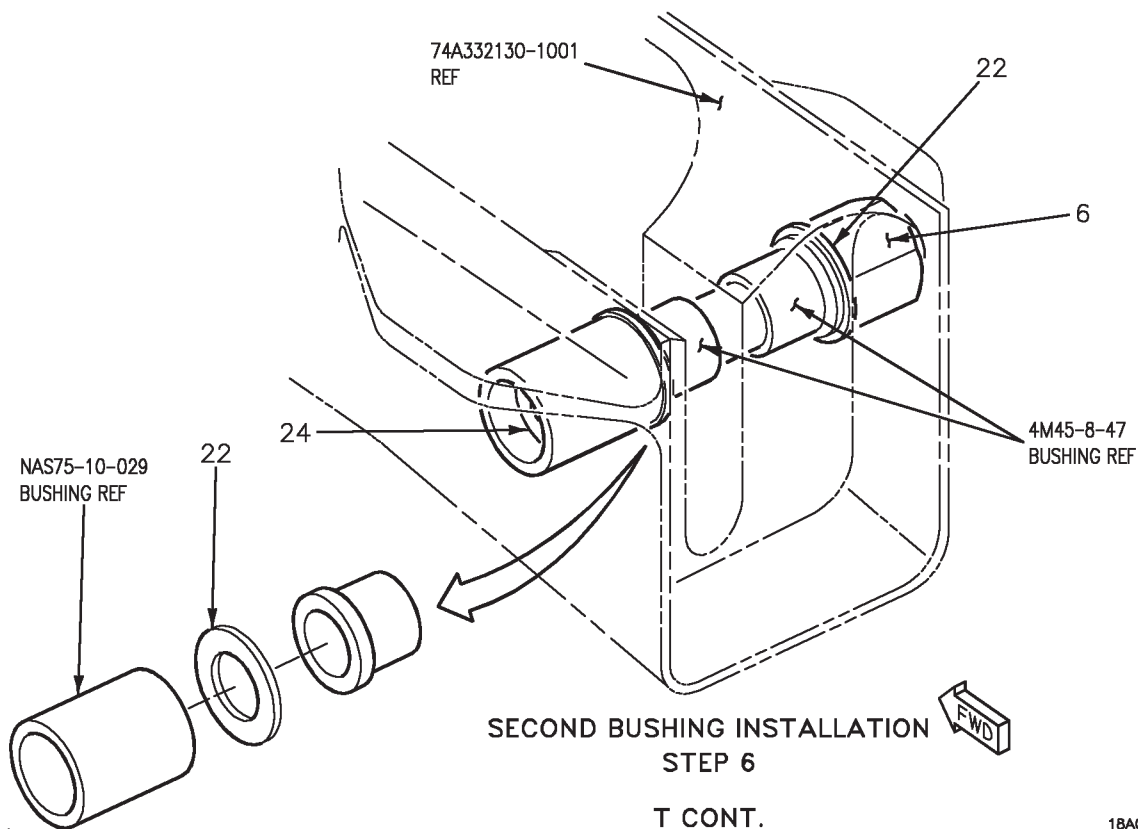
Bushing Removal, Installation, and Reaming (Sheet 30)
